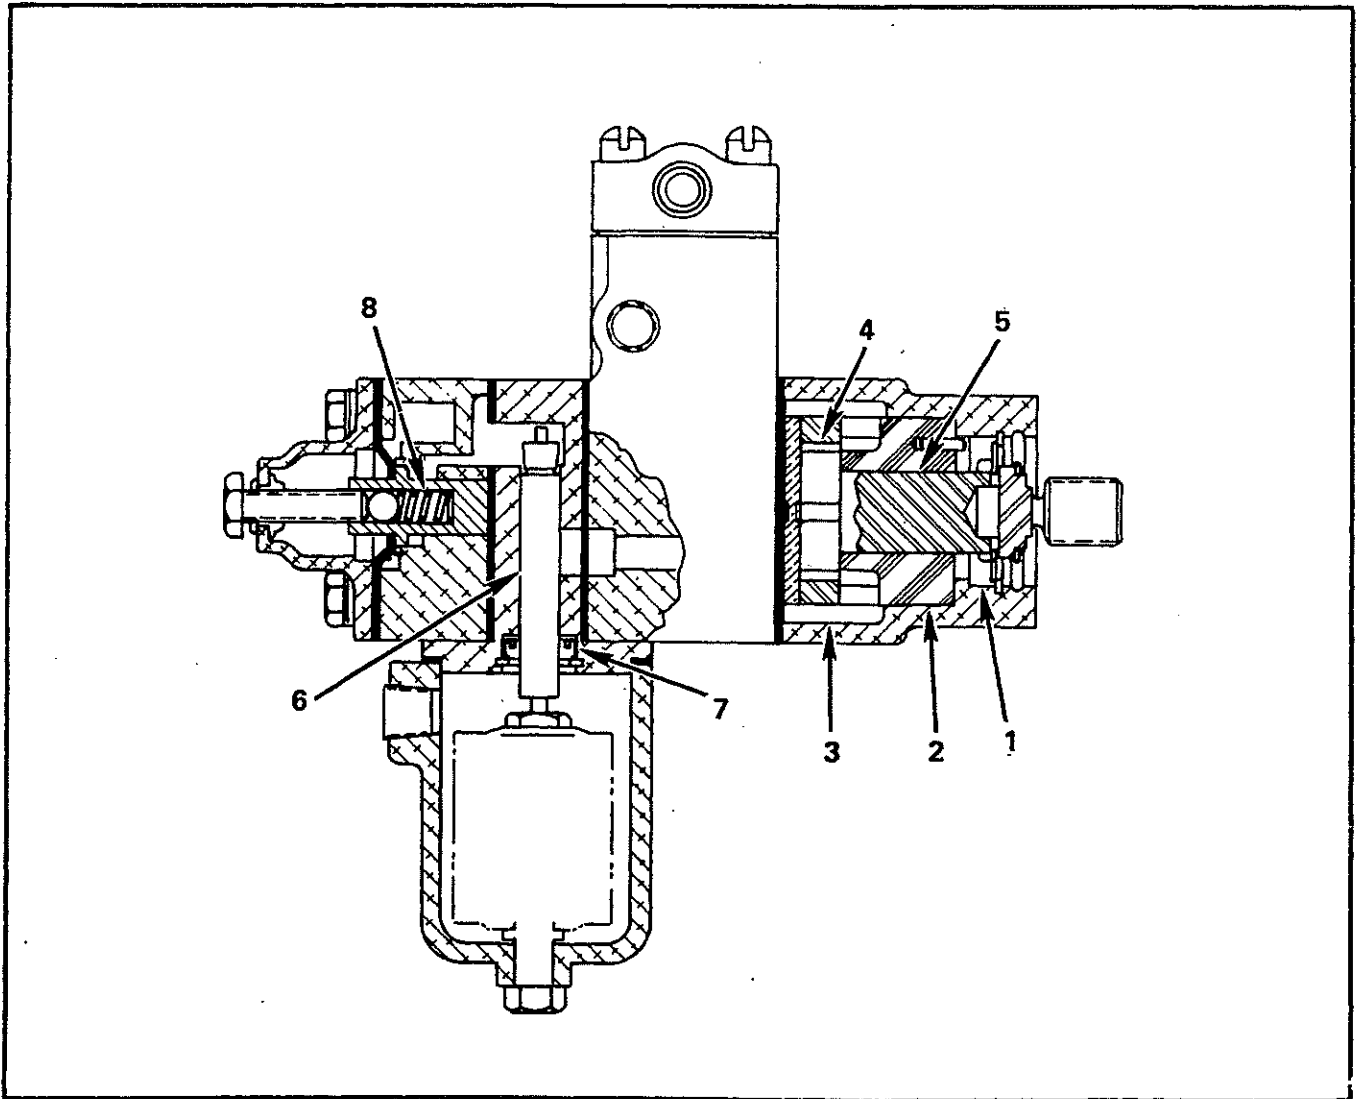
SERVICE LIMITS FOR FUEL PUMP ASSEMBLY
